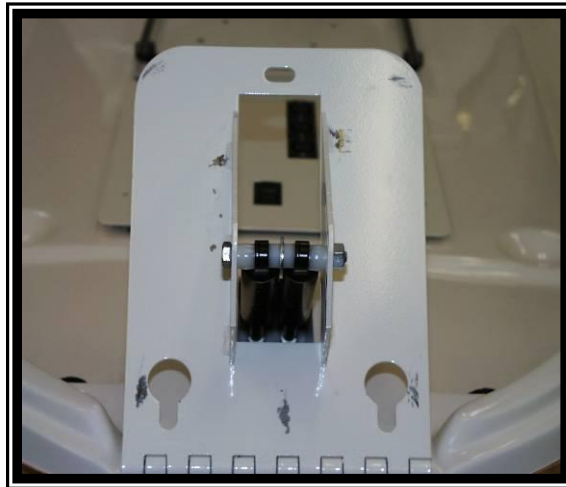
Removing Hinge Plate Screws on Base Chassis.
